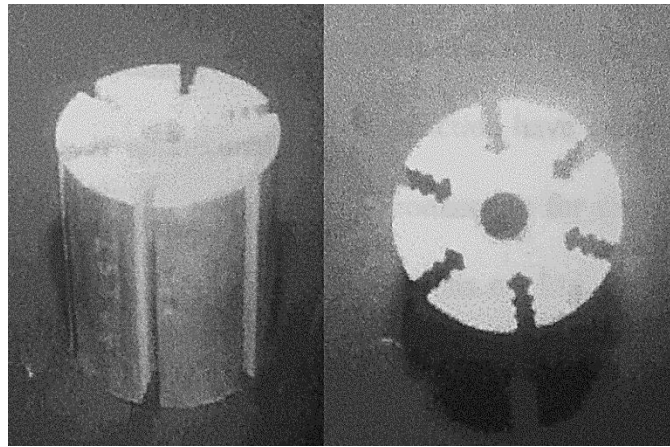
Geometrica® 6-6090 Extruded Aluminum Connector (Doran 1997)
